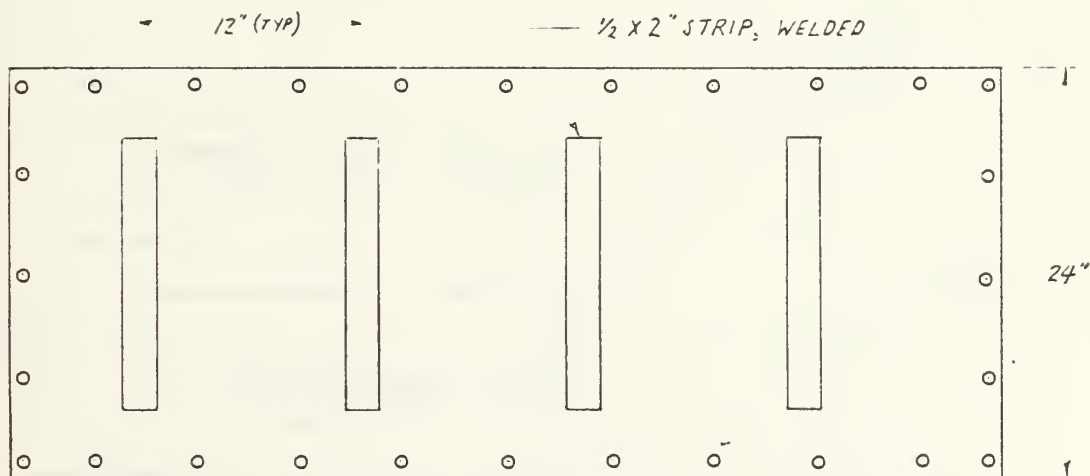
P. LSPCD CLAMP ASSEMBLY,
